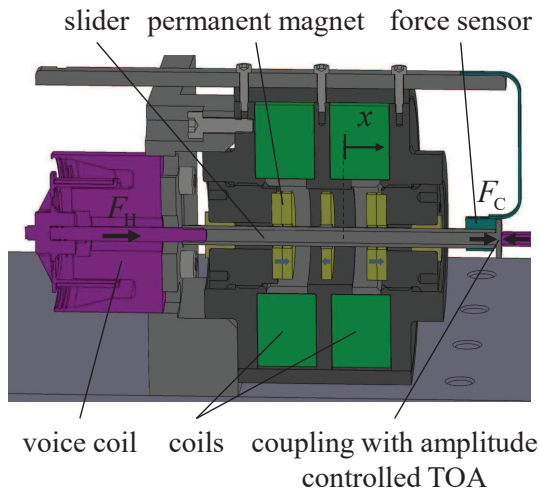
Design of the HiL-actuator with magnetic spring elements.
